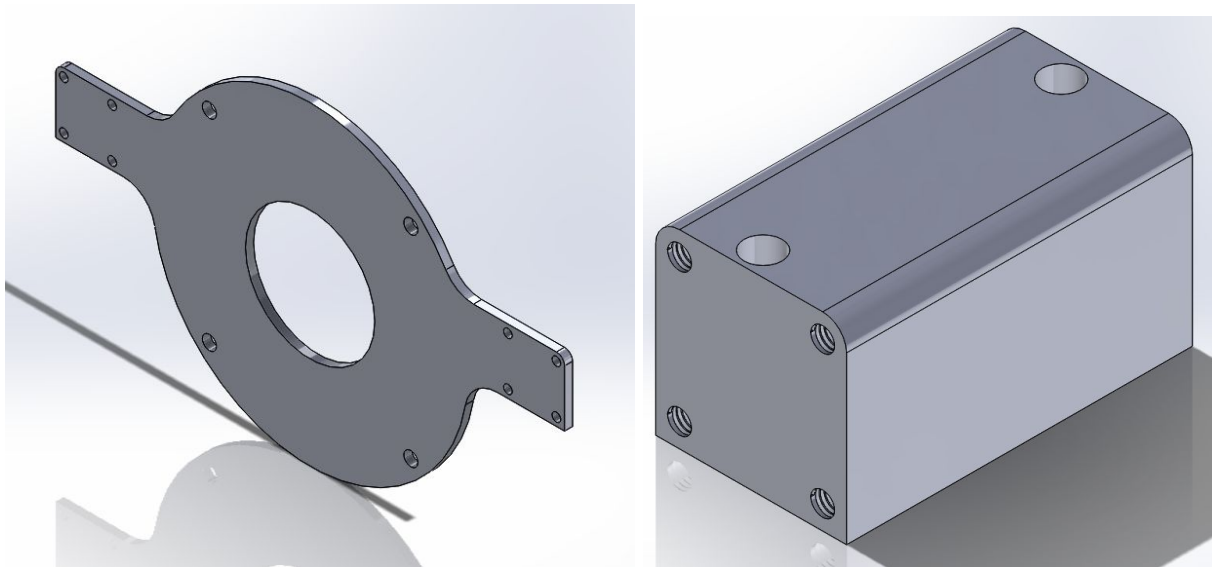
ME1002 Final Mount Front Plate & Side Block CAD
